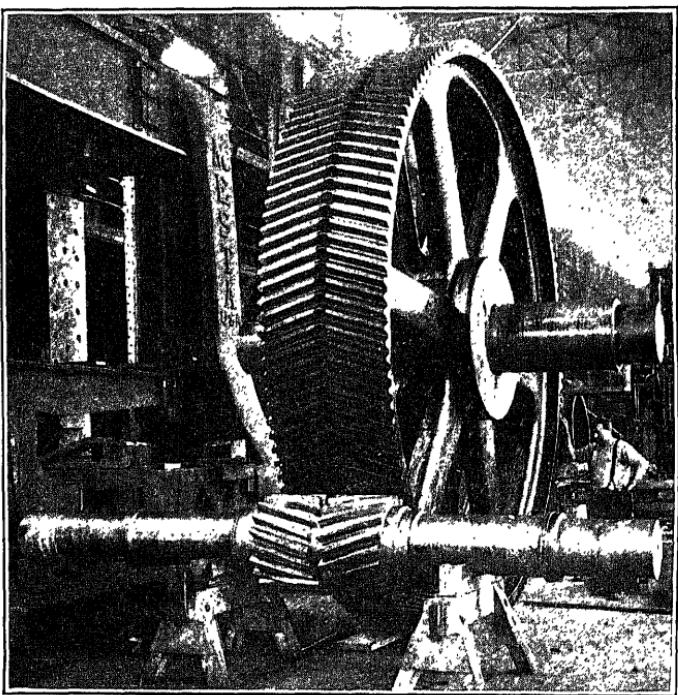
Large herringbone gears for heavy work in steel mills. Mesta Mfg. Co., Pittsburgh.
